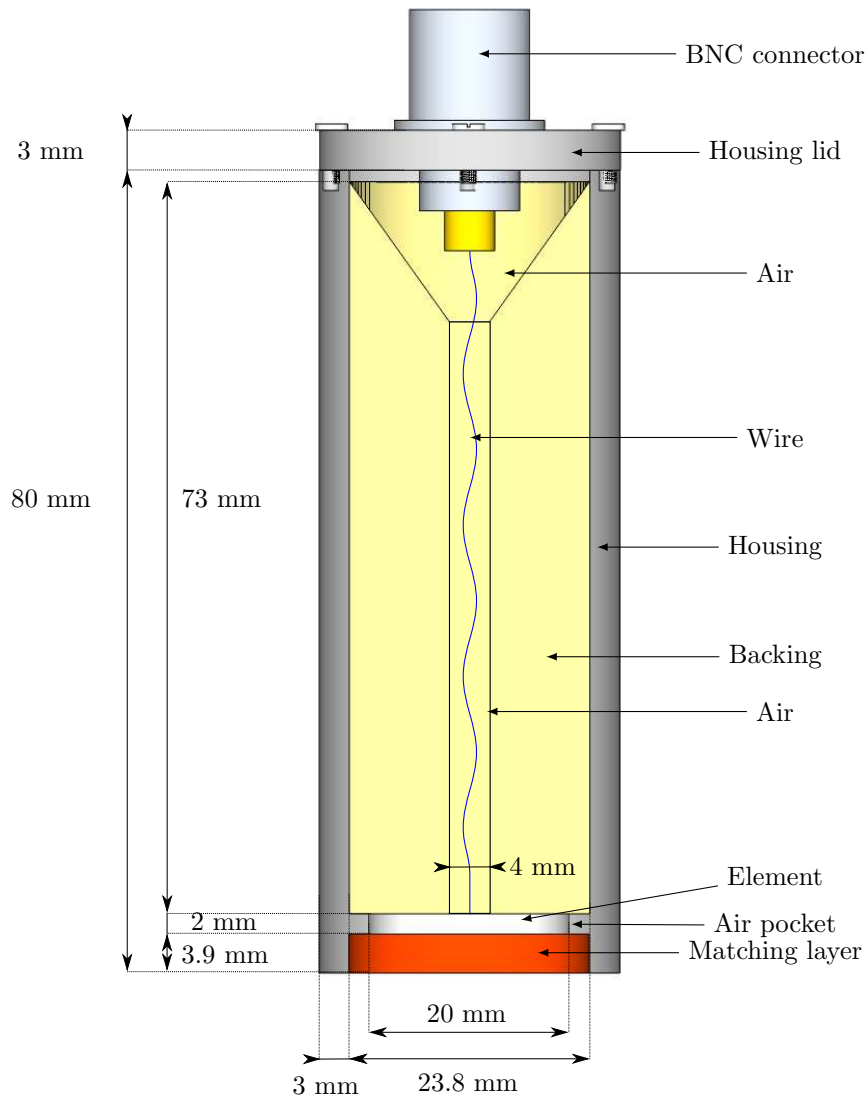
Sketch of the assembled transducer. Side view cross section. Showing the piezoelectric disk, matching layer, housing cylinder, backing layer, screwed on housing lid, wire, and BNC connector. The silver conductive epoxy between the piezoelectric disk and the matching layer and between the matching layer and housing wall is not shown.
